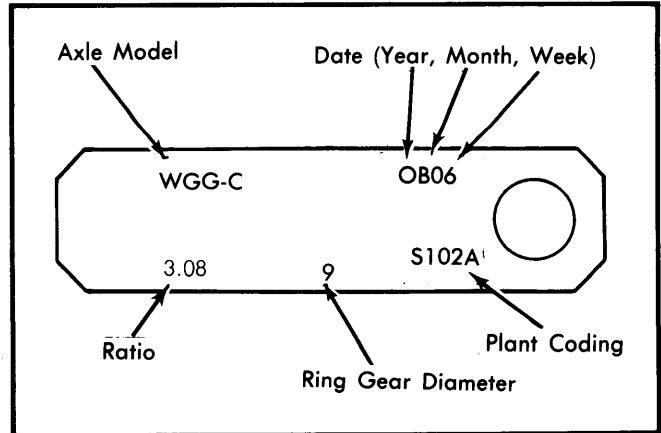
Ford Motor Co. Rear Axle Identification Tag
